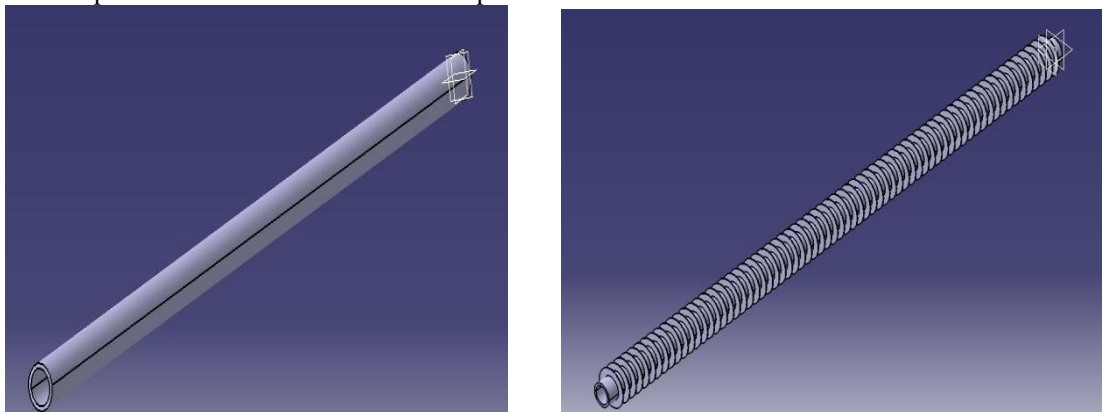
(a) Plain tube Geometry and (b) Spiral Fines Tube With Different Fin Geometry
